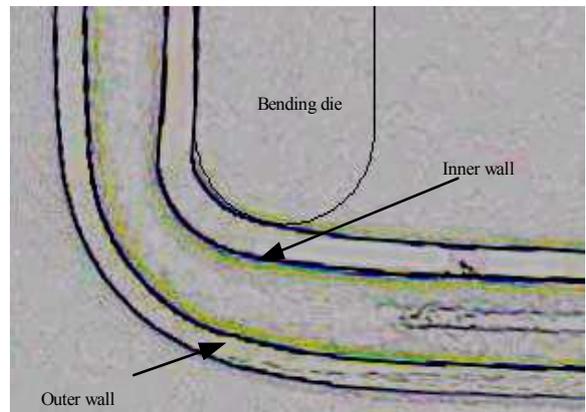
Axial cross section of bended tube added with axial thrust and mandrel shift
